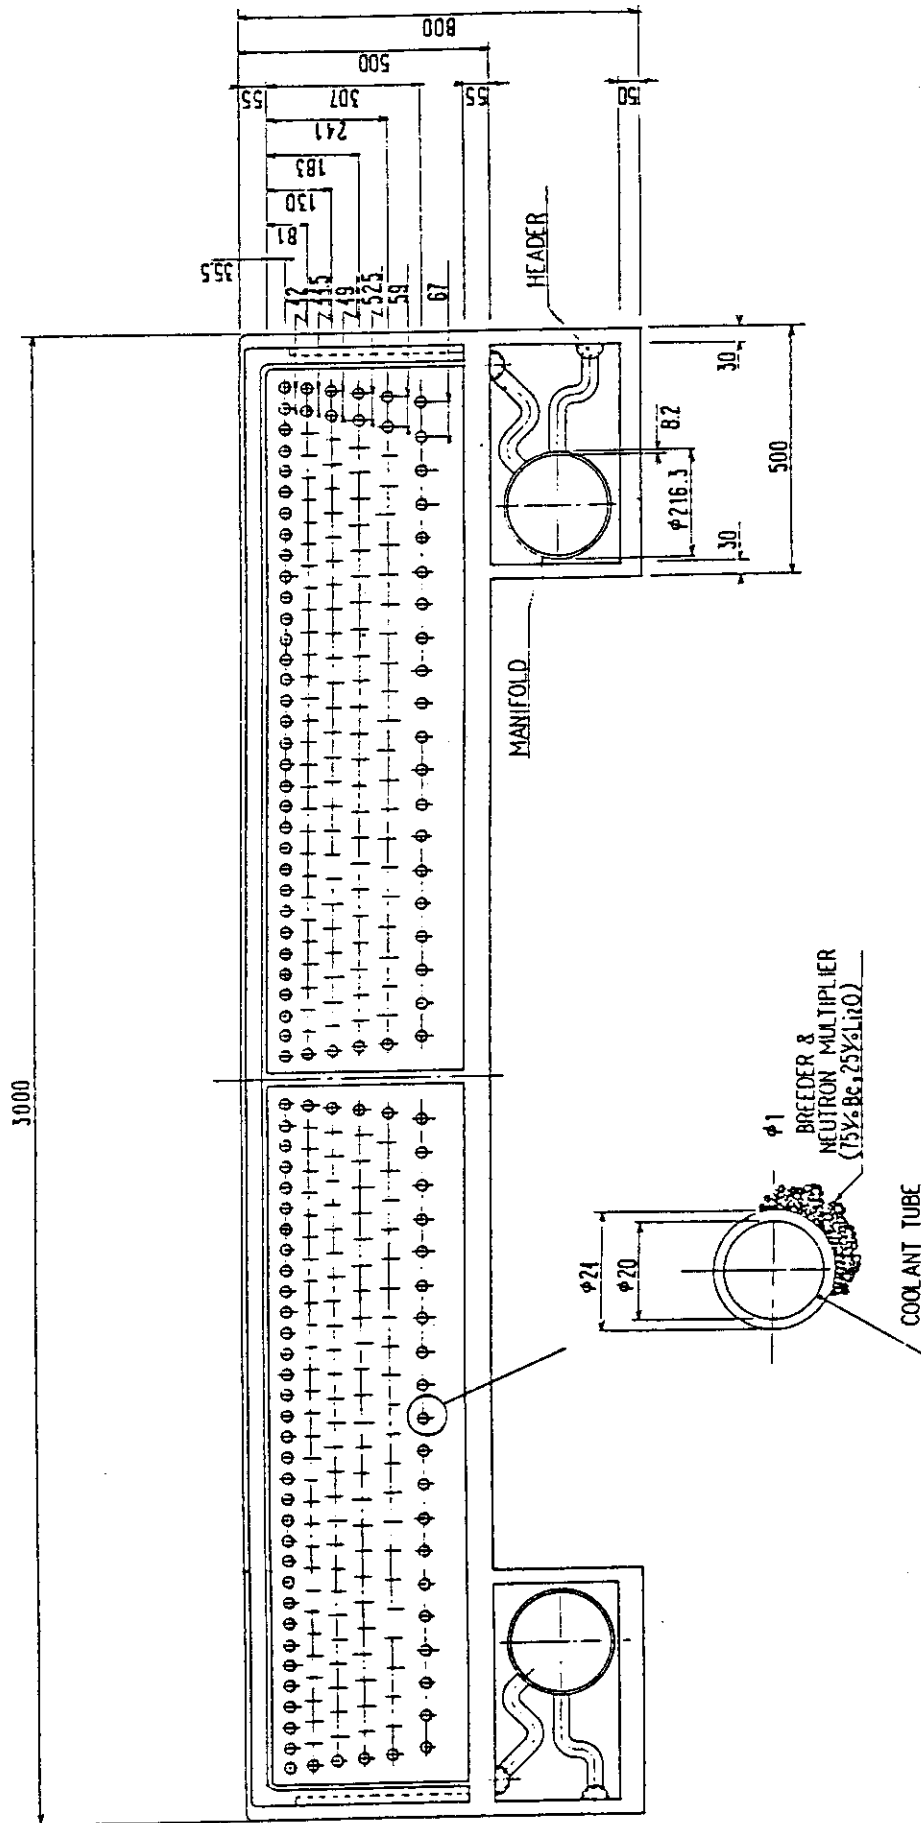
Arrangements of Coolant Tubes in Tritium Producing Blanket
